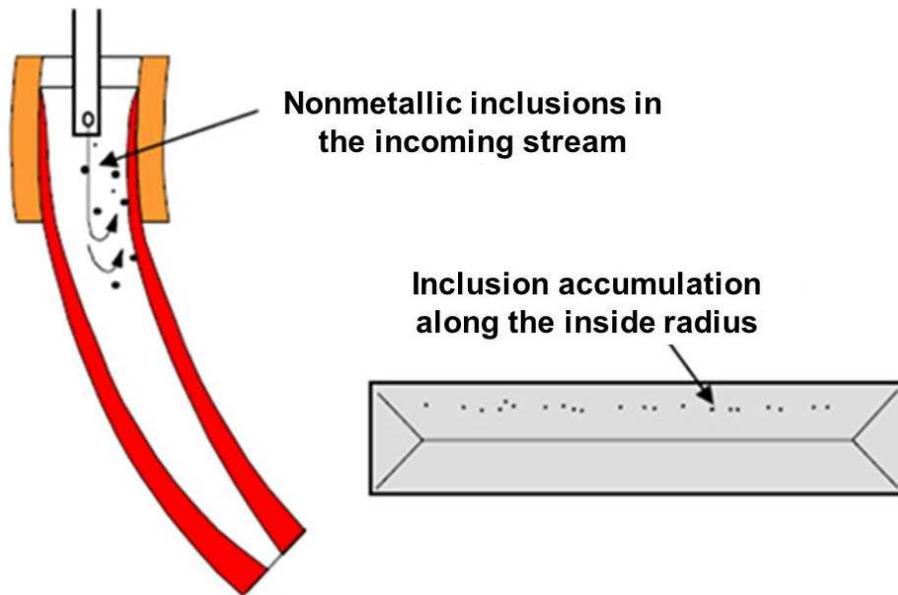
Basis for the formation of an inside radius concentration of oxide inclusions in curved mold casting machines.
